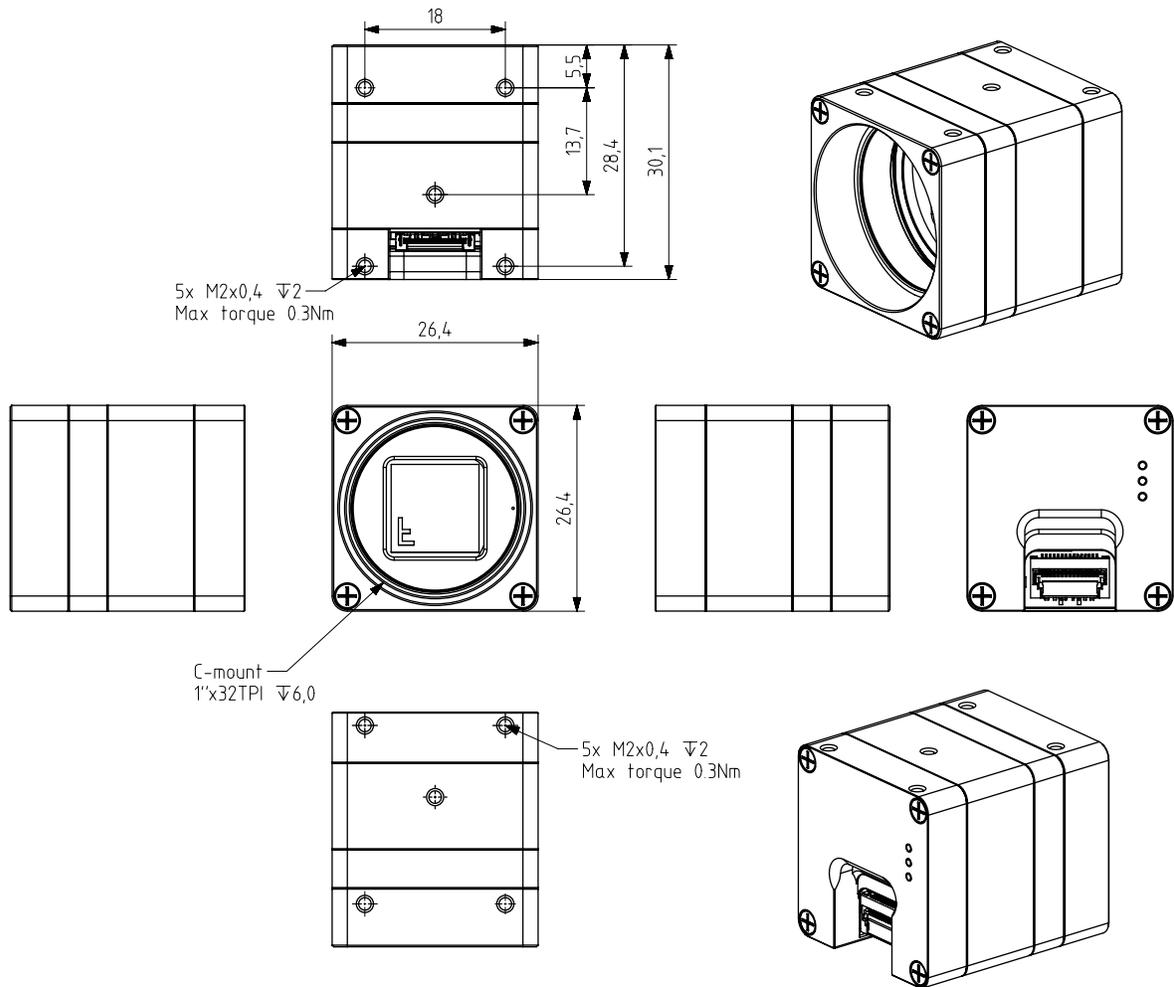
Dimensional drawing of MQ022xG-CM-FL
